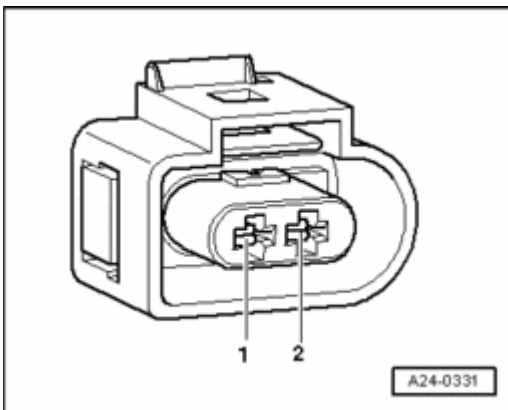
Identifying 2-Pin Electrical Harness Connector & Terminals
